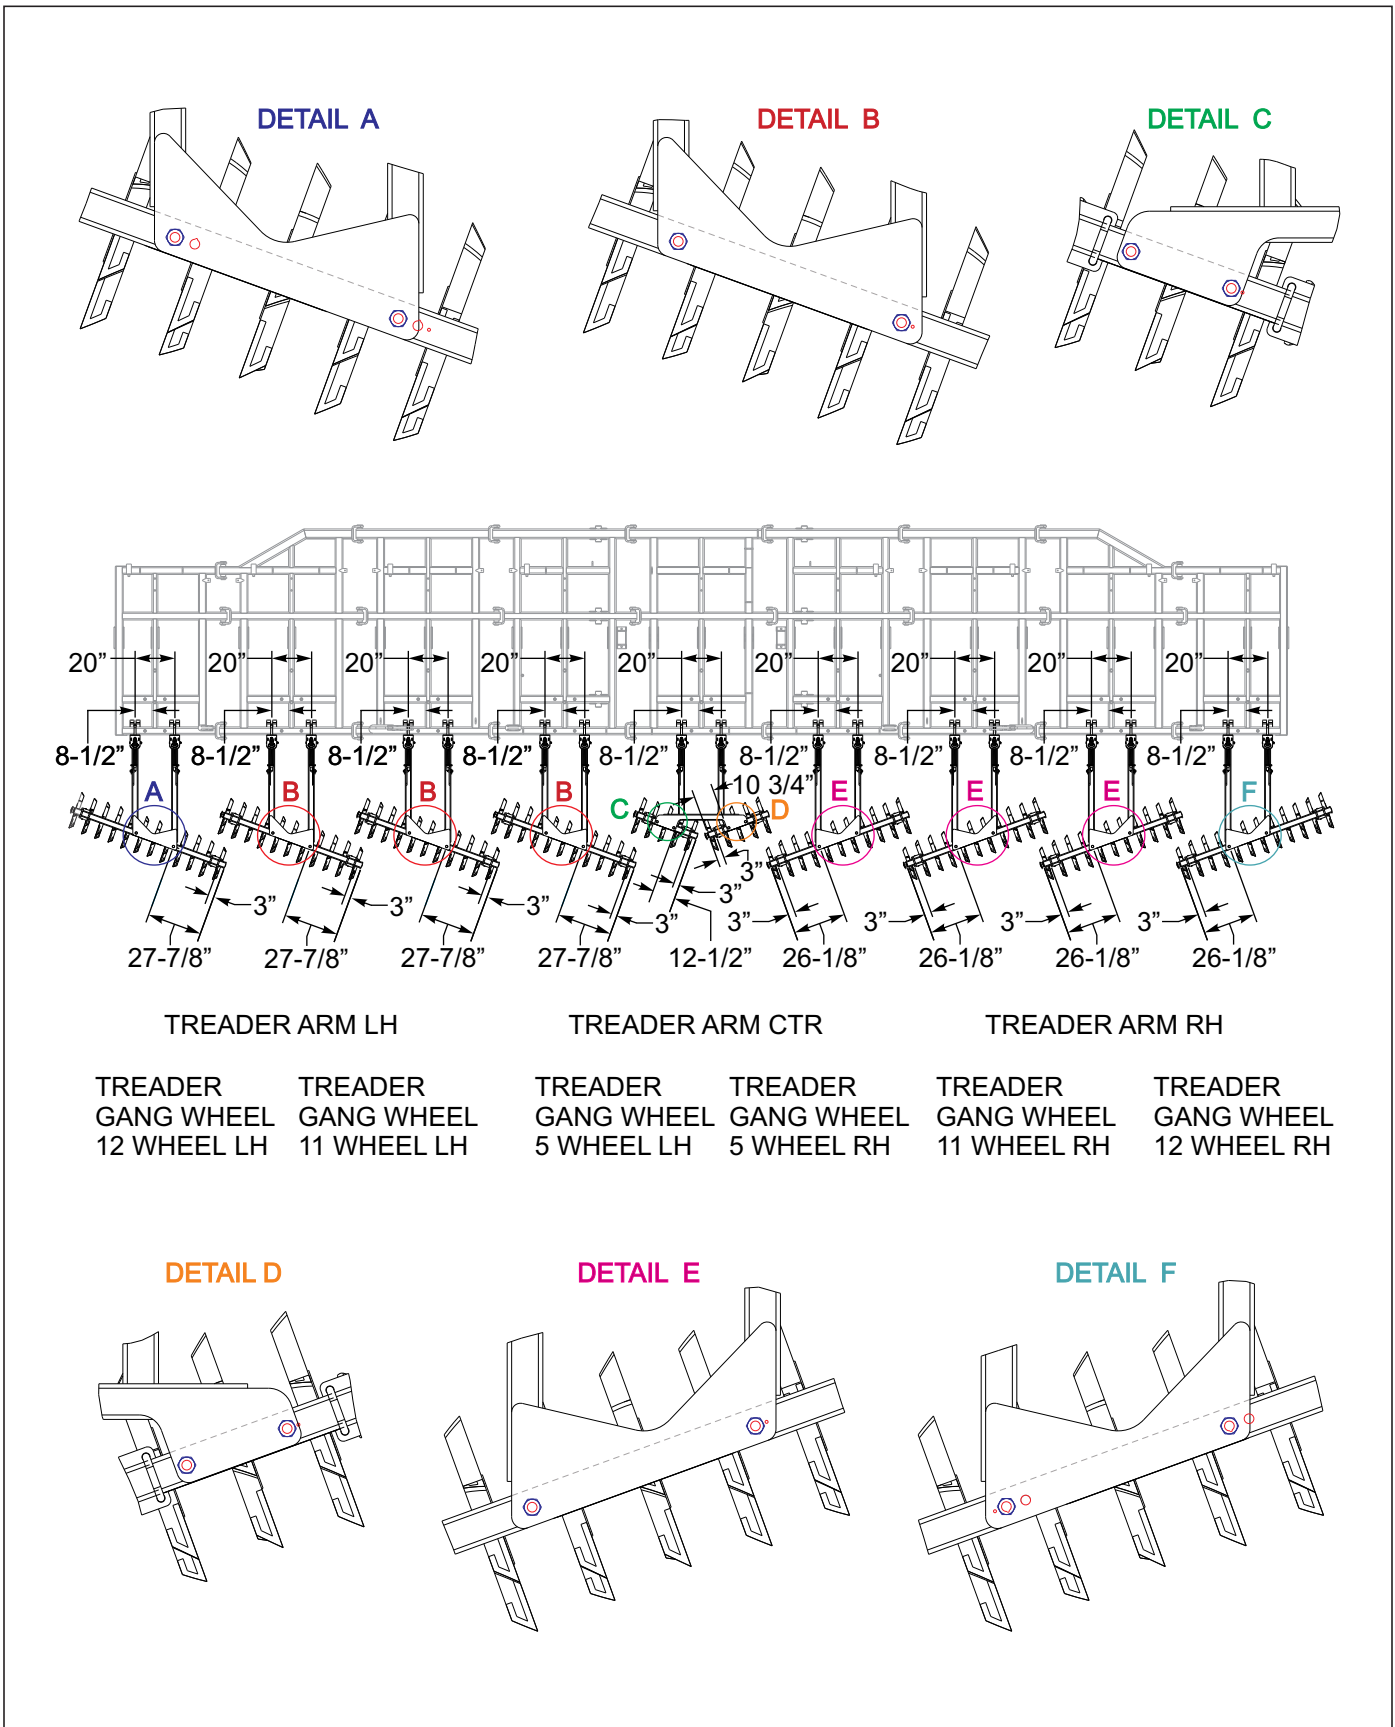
Treader Arm & Wheel Placement 1790-52'
